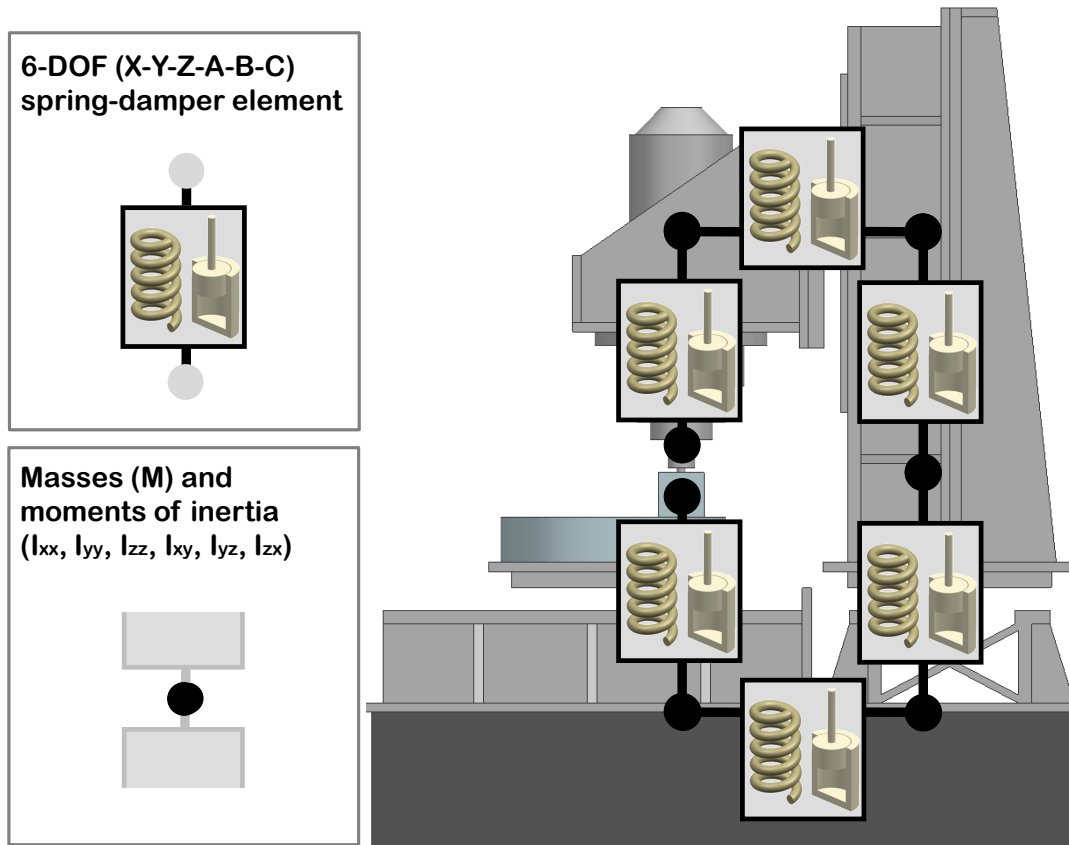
Schematic *Rigid Body Model* of a machine tool.
